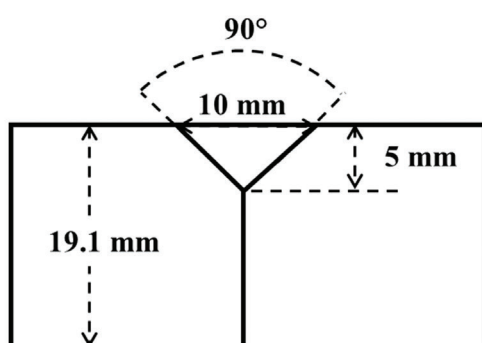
Cold-wire tandem submerged-arc welding (CWTSAW) test weld configuration.
